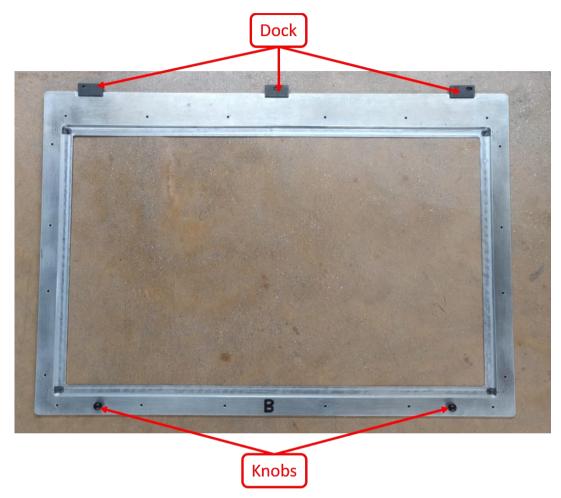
This is the stainless steel frame used to upload the material in the machine.
